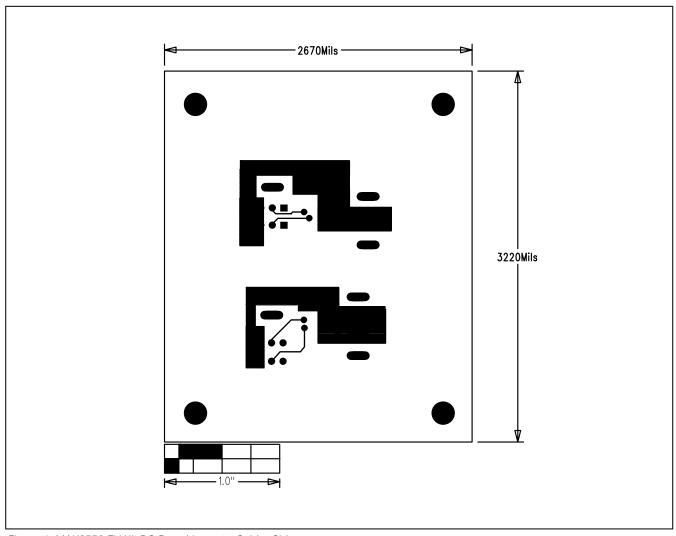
MAX8559 EV Kit PC Board Layout—Solder Side
